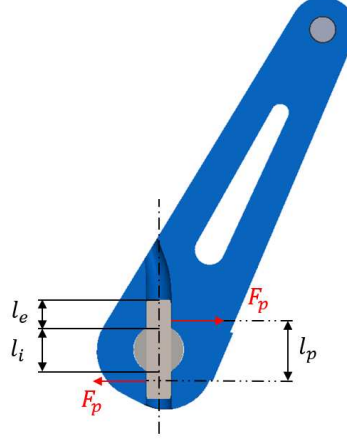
A sectional view of the driven shaft, cylindrical pin, and Link 1, in which the couple of forces F_p due to τ_{out} , length of the pin inner the shaft l_i , outer the shaft l_e , and distance between the forces' application points l_p are shown.
